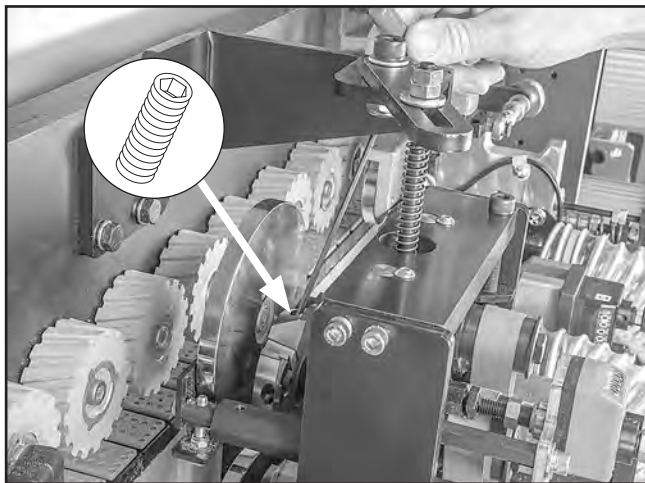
Loosening flush trimmer set screw (upper cutterhead shown).
